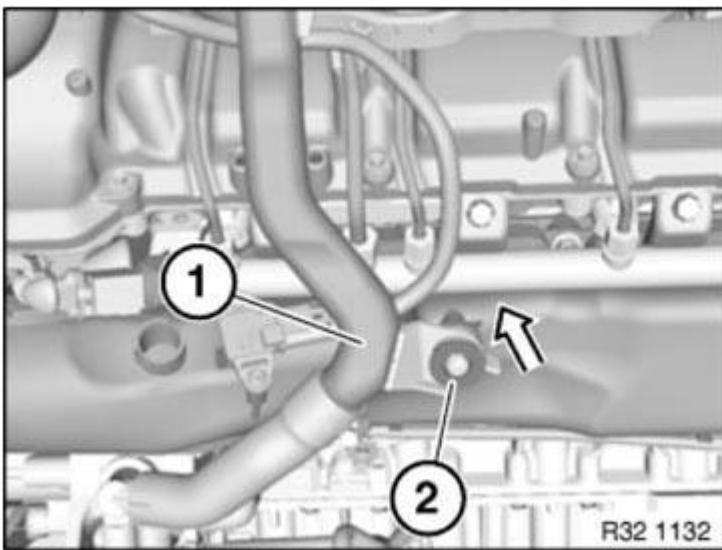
Removing Intake Pipe Section In Direction Of Arrow From Holder
